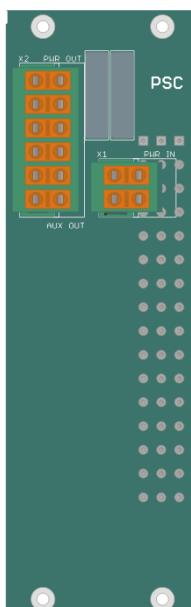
Rear side of the BP-PWR101-0, with cage clamp terminals
